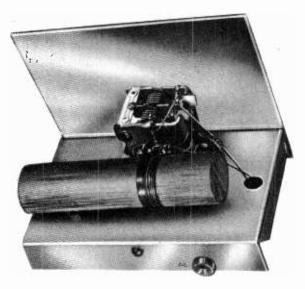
Details of the coil and the manner in which it is mounted on the chassis
